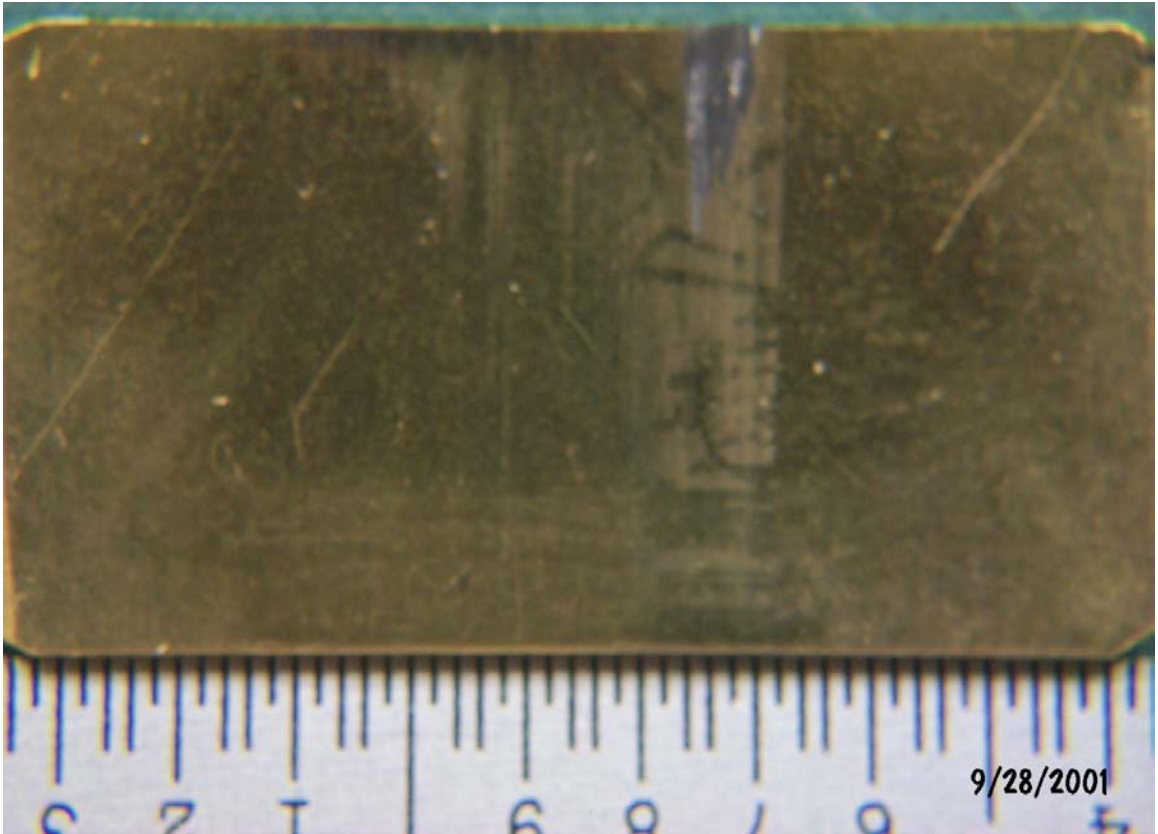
TiN coated A2 tool steel after 500 cycle test with severe coating removal
